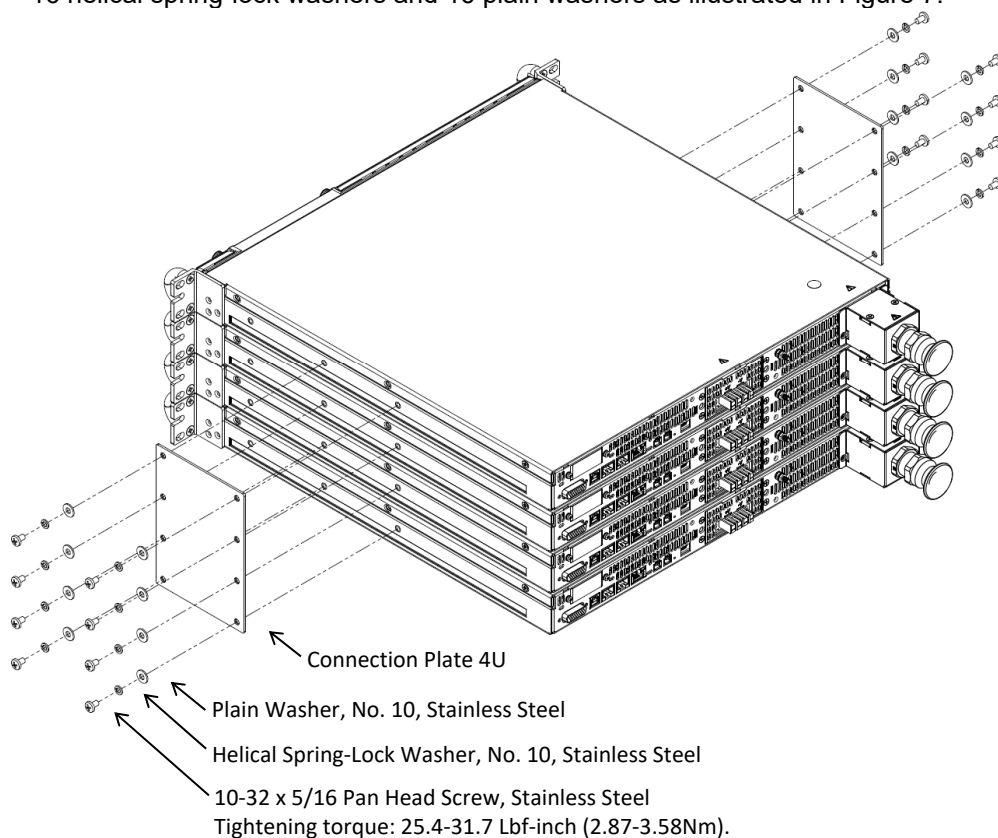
Four 150V-600V Units Connection Plates 4U Assembly
